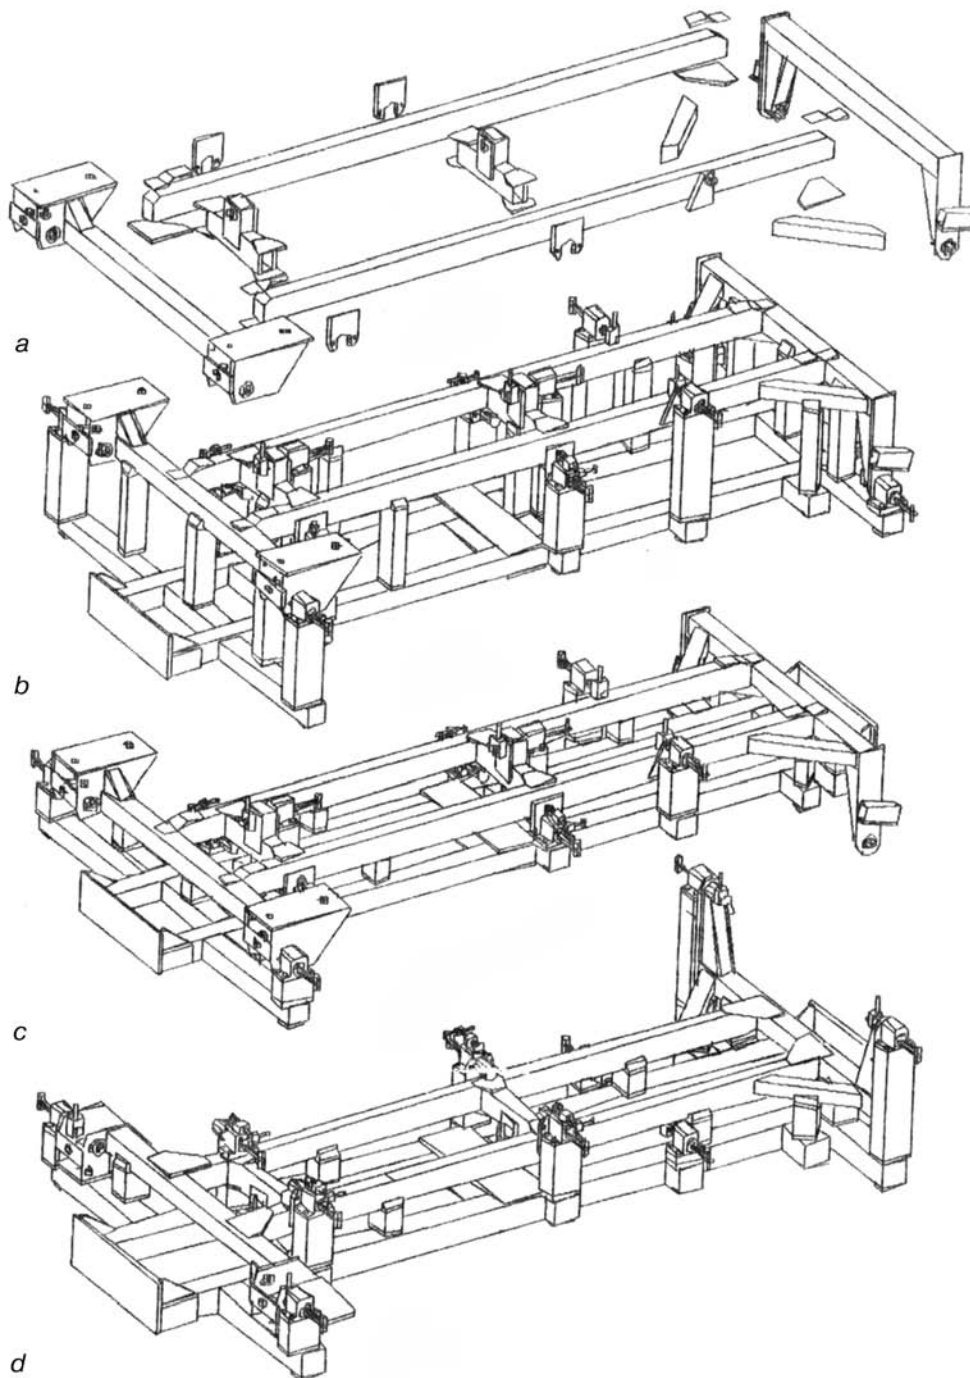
Schematic of welded structure assembly (*a*) and variants of design embodiment of assembly-welding bench with a relatively high (*b*), preferable position of the center of gravity of WAE – AWJ (*c*) and changed position of WAE in welding (*d*)
